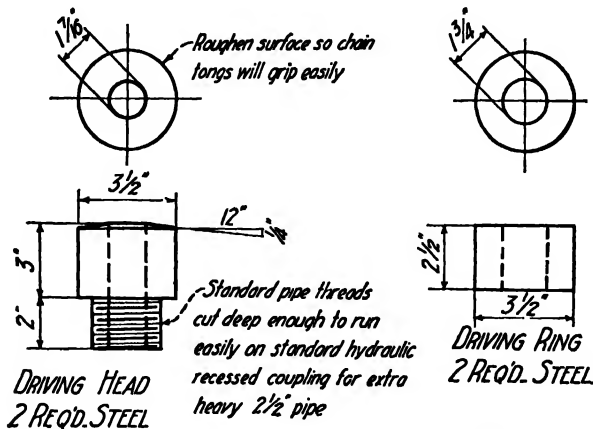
Steel Drive Head for Driving Casing Pipe.
